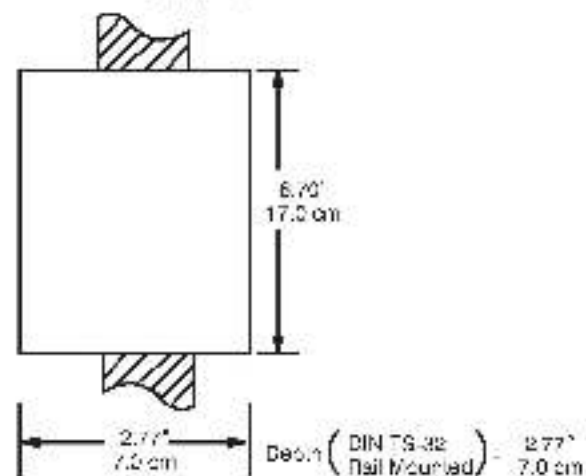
Terminal Board Assembly Mounting Dimensions
